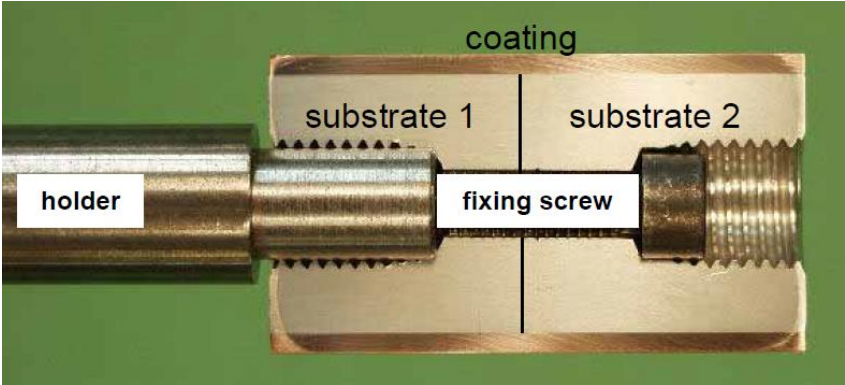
Tabular Coating Tensile Test (TCT-Test) [51]
